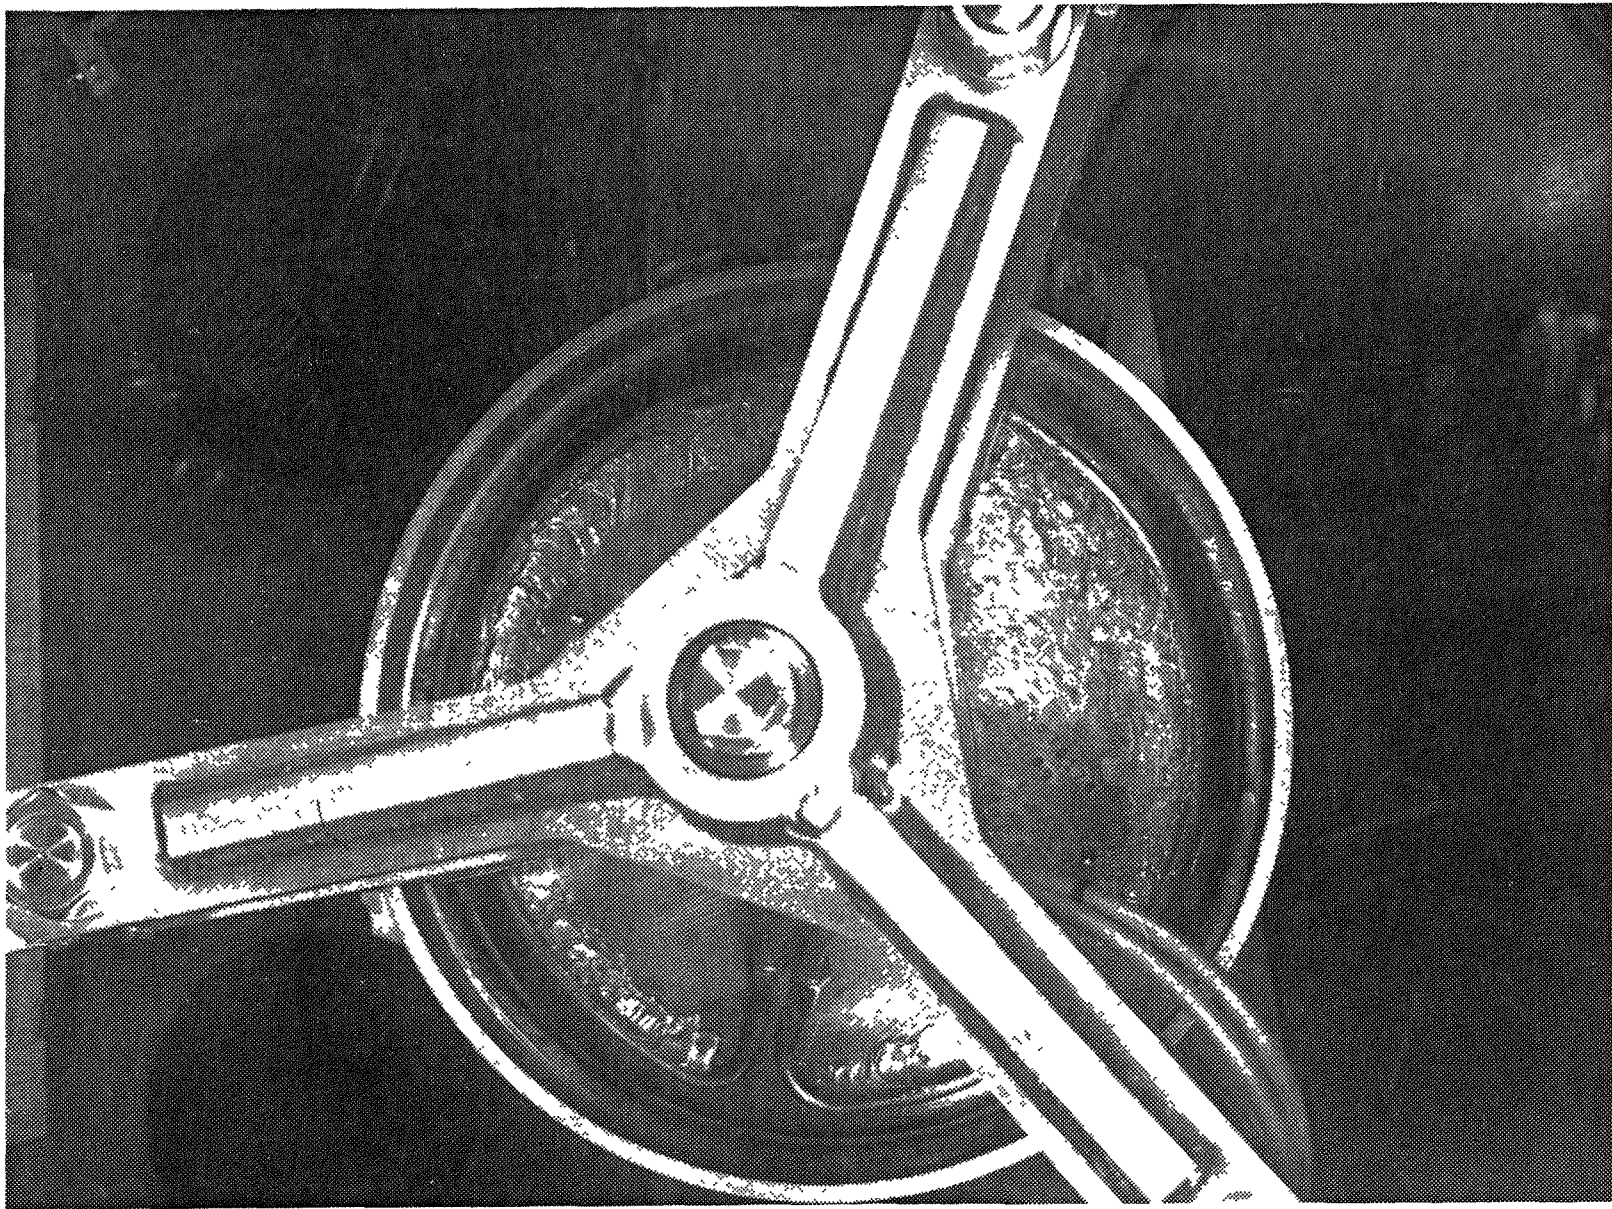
Weld Tooling and Associated Fixtures-IHF to
